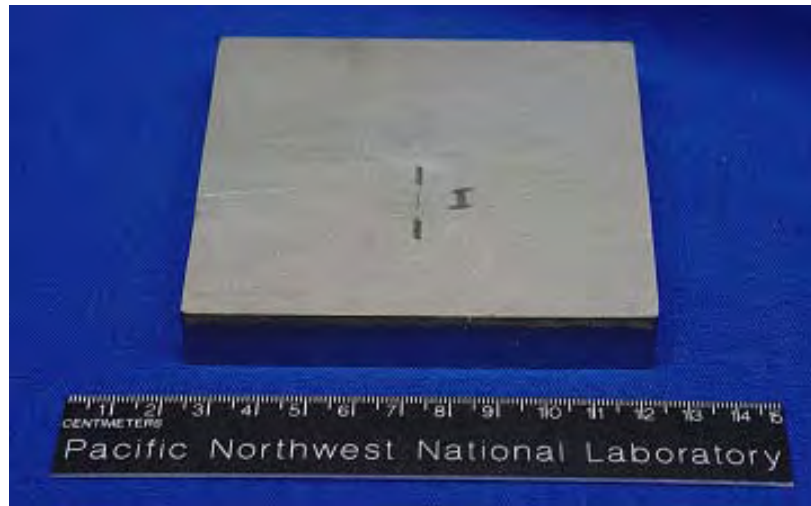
Midland Control Rod Drive Mechanism Used for Testing Immersion UT Equipment and Techniques
